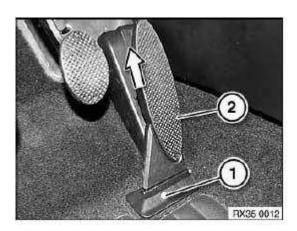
Accelerator Pedal Module And Socket Head Cap Screw
